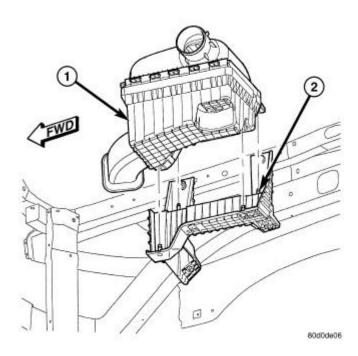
Removing/Installing Air Cleaner Housing Courtesy of CHRYSLER LLC
